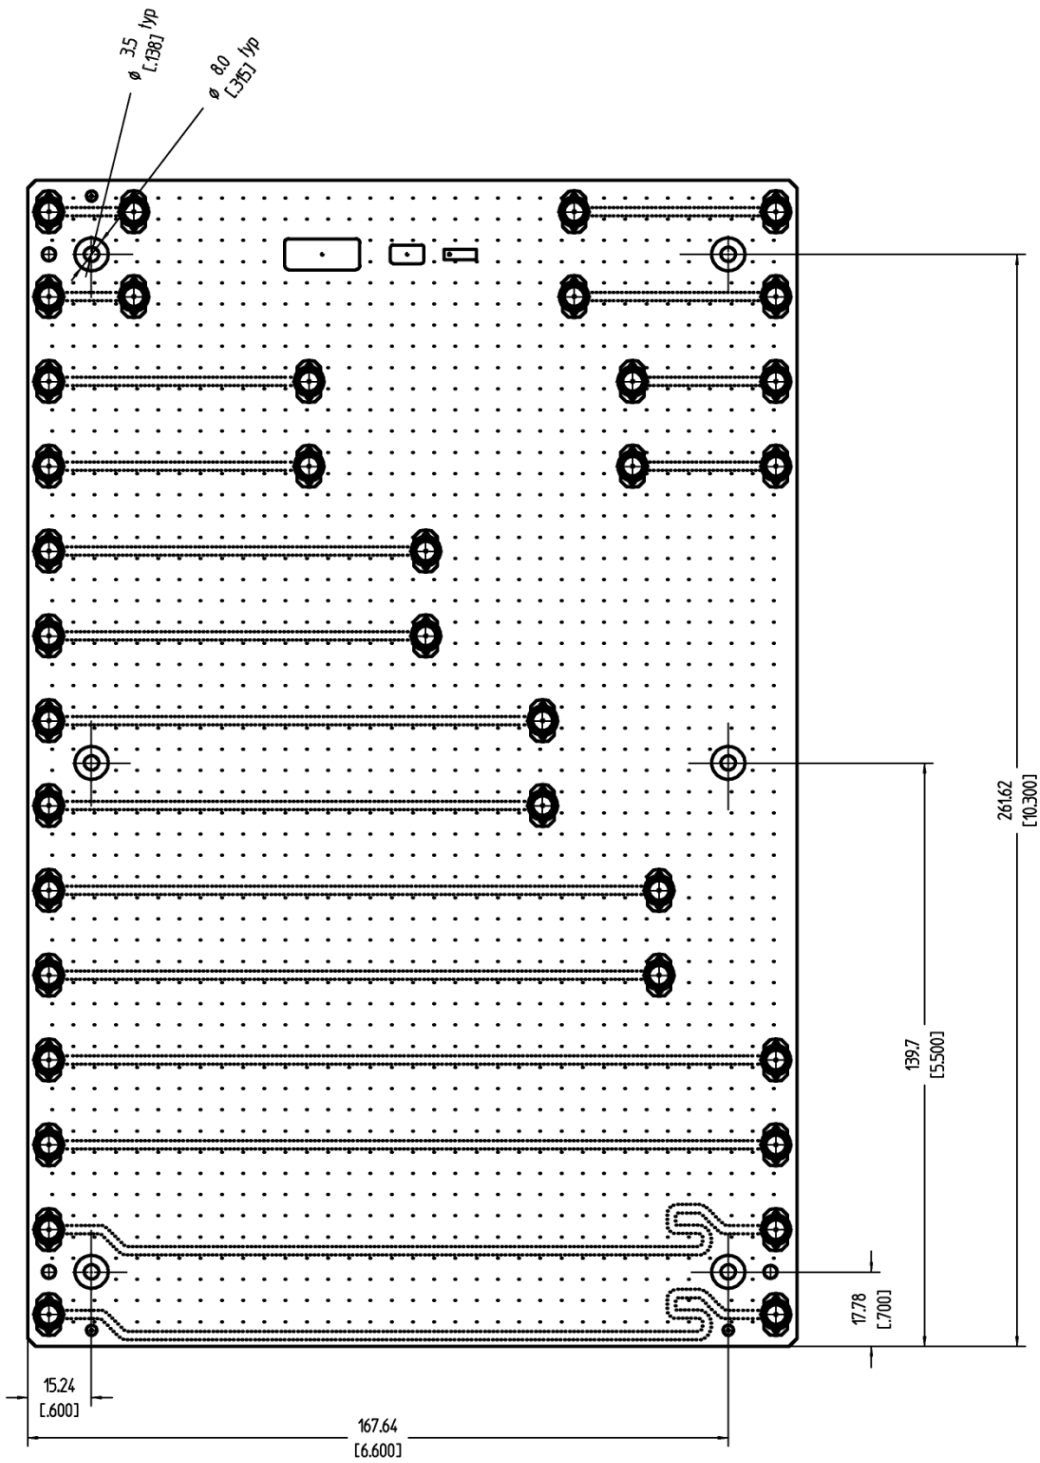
Mechanical drawing of M8049A-002 ISI channel boards with position of fastening holes.
